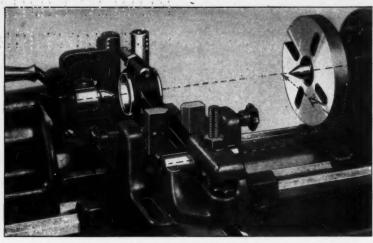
Connecting rod boring attachment mounted on lathe for holding and aligning connecting rod.
